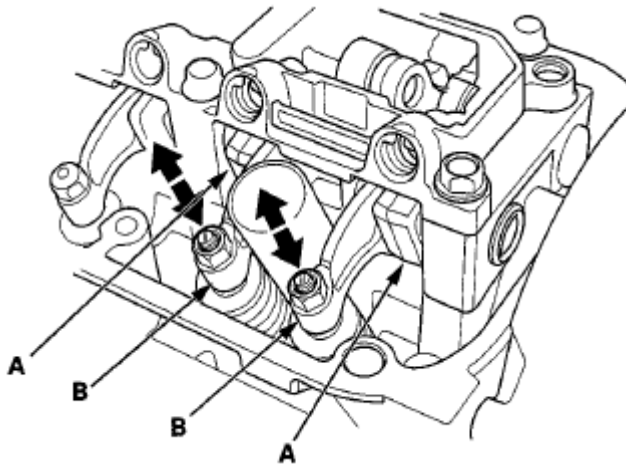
Identifying Exhaust Primary & Secondary Rocker Arm Moving Position
